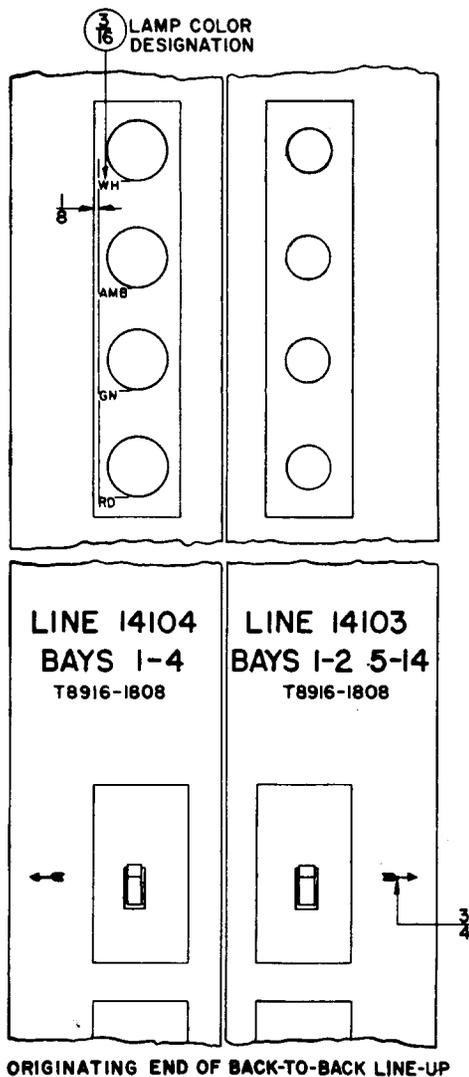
Stamping for Aisle Pilot Alarm Lamps and Aisle Lighting Switches
